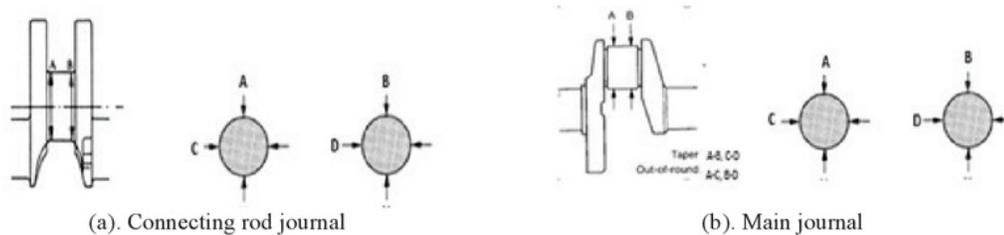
Measurement Point of Connecting Rod and Main Journal [5]
